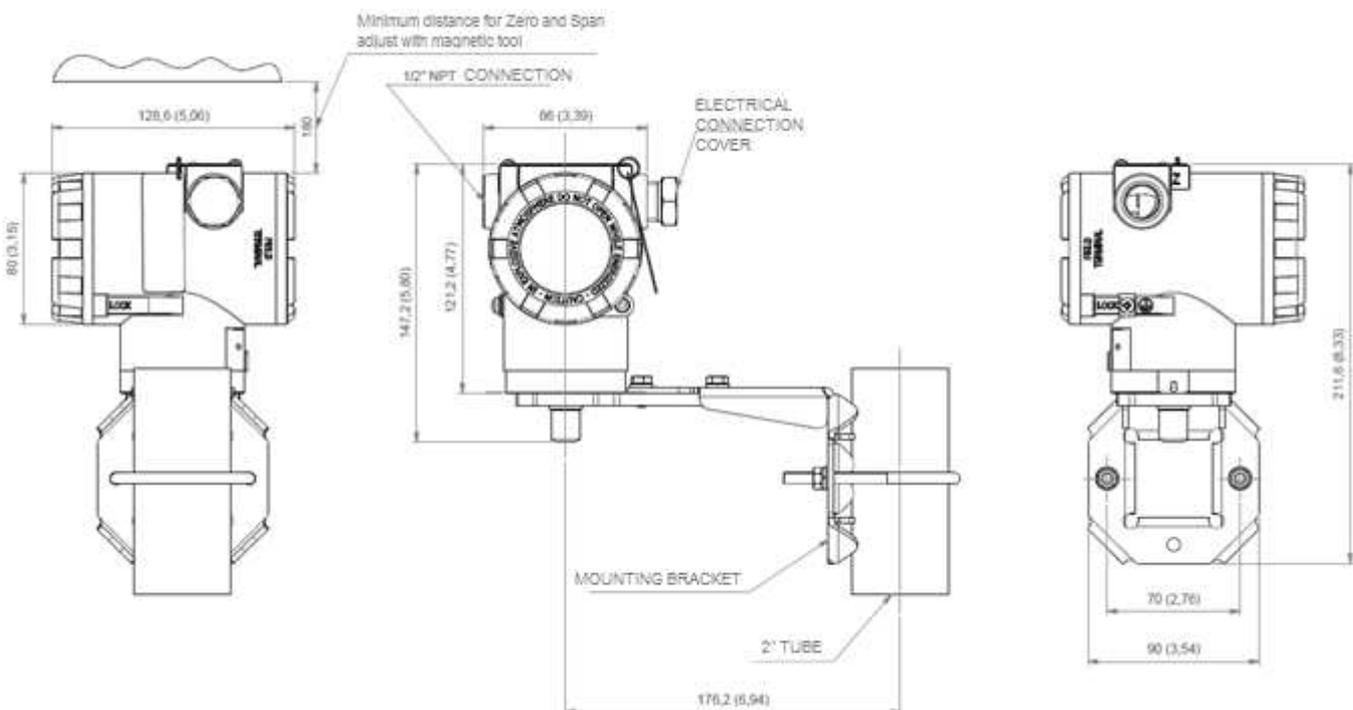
Dimensional and mounting drawings for VTP10-H.
